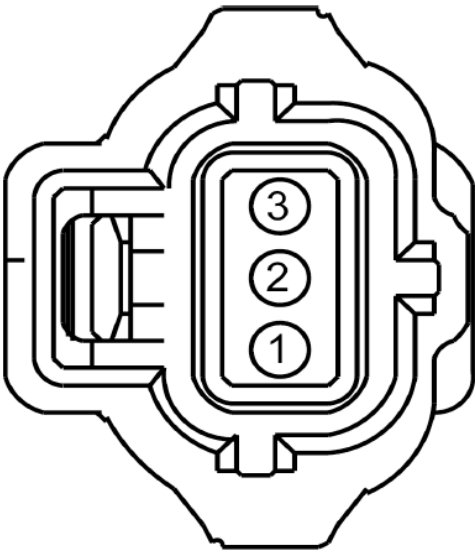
Crankshaft Position Sensor Connector End View (C101)
